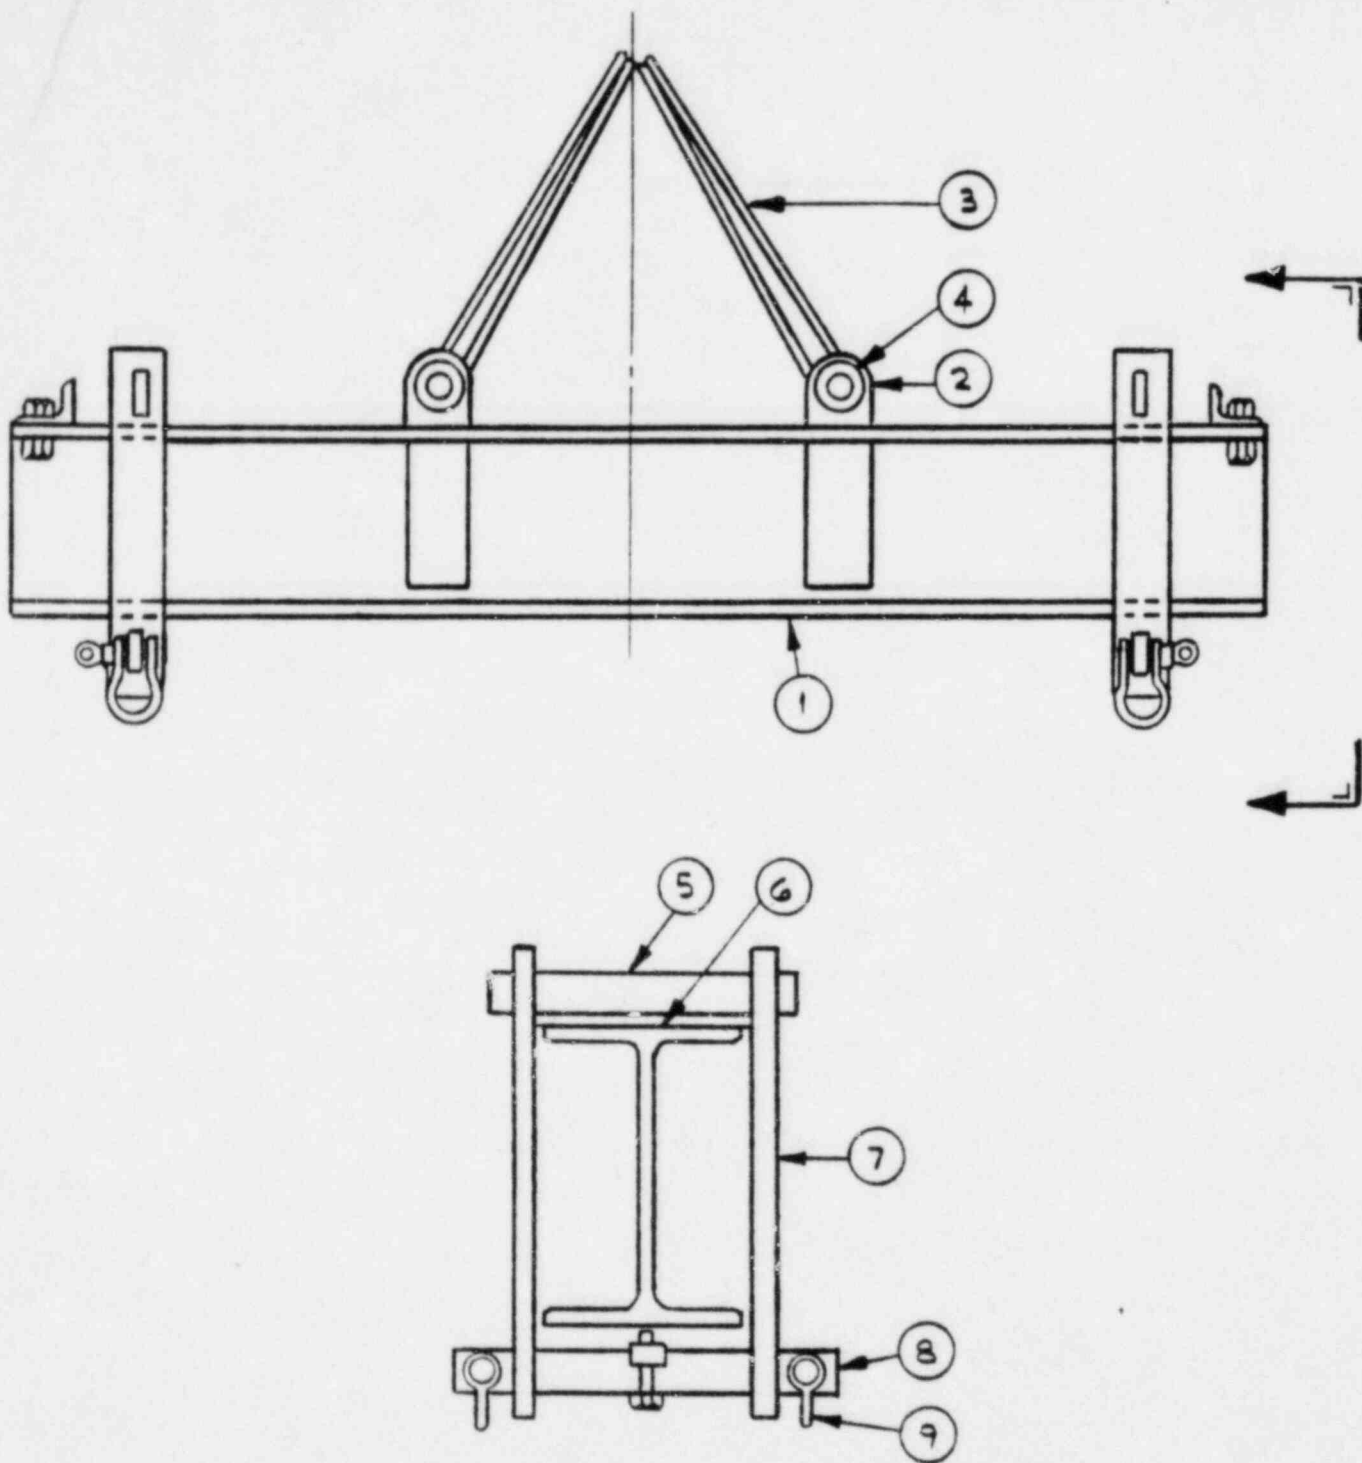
TURBINE COMPONENTS LIFTING ASSEMBLY
